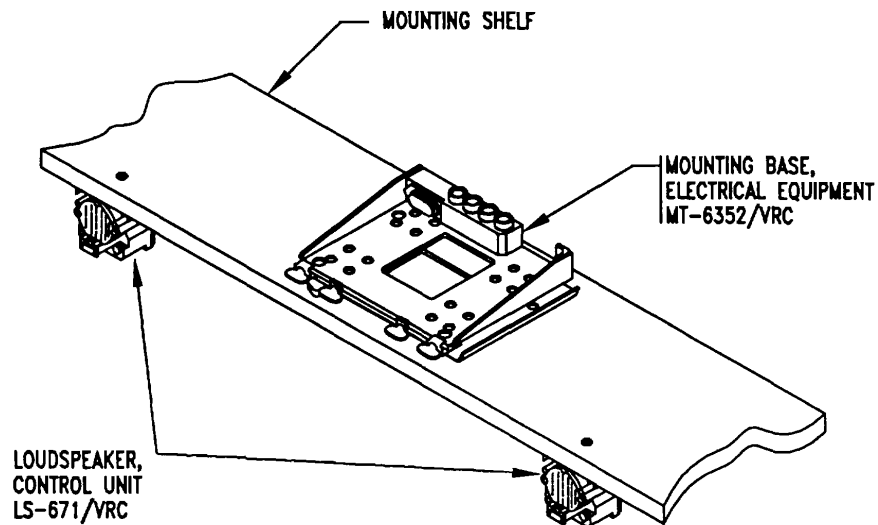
(1). MK and Radio Installation: MK Equipment Locations (Typical)
